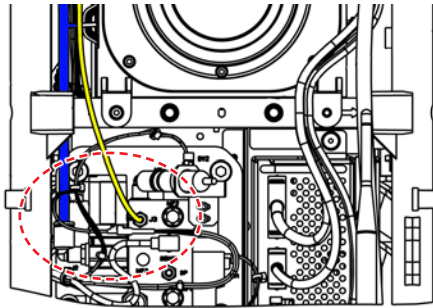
Pneumatic Tubing Connecting Pneumatic Manifold and Fluidics PCB Assembly
